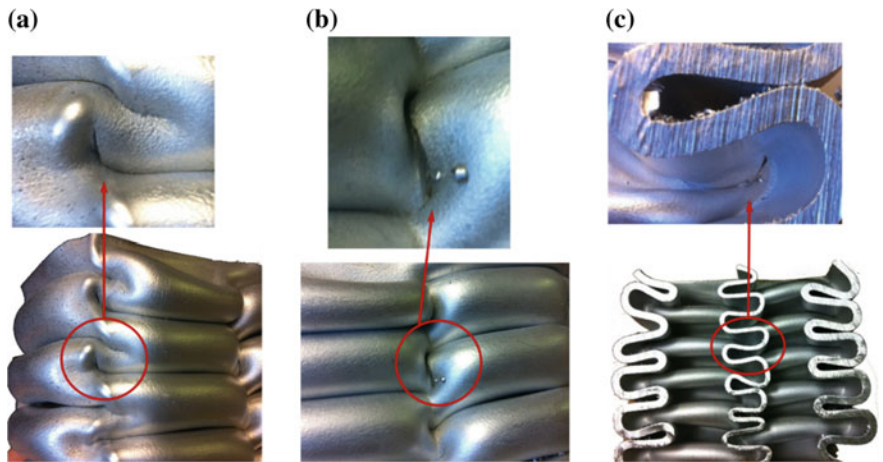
Fracture in tested profiles. a Fracture in corner, b and c fracture at T-junction of the inner wall and the outer wall (outer surface and inner surface)
